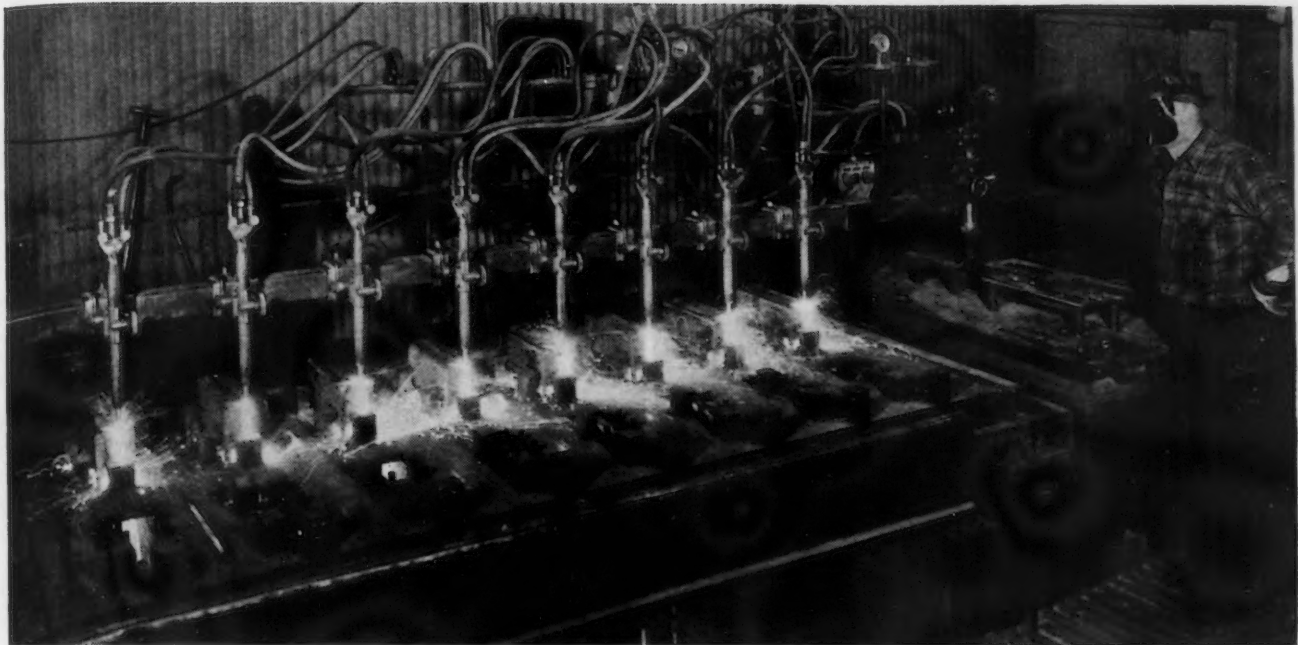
Beam socket bars are beveled and slotted on this eight-torch Airco Oxygraph, equipped with jigged work table and magnetic cam tracer table. Bevels are cut on rear set of jigs as shown. Eight jigs in front hold bars for slot cutting.
